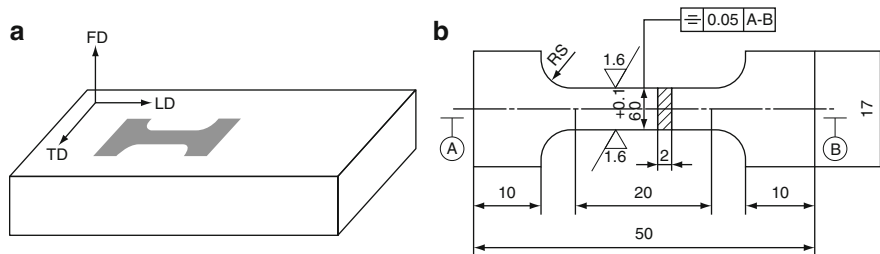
Schematic presentation of the tensile samples used in the testing. (a) Tensile samples cut out geometry from the as-forged stock (b) Specimen shape and dimension for tensile test
